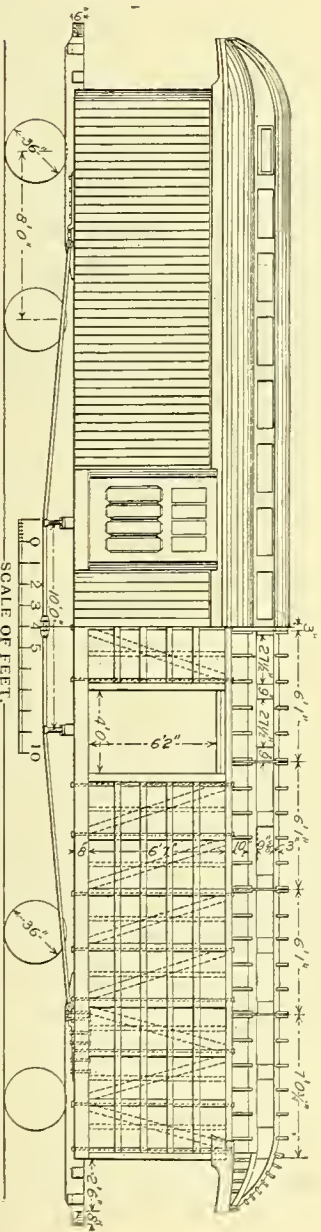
Half Side Elevation, showing Side and Side Brooming.
